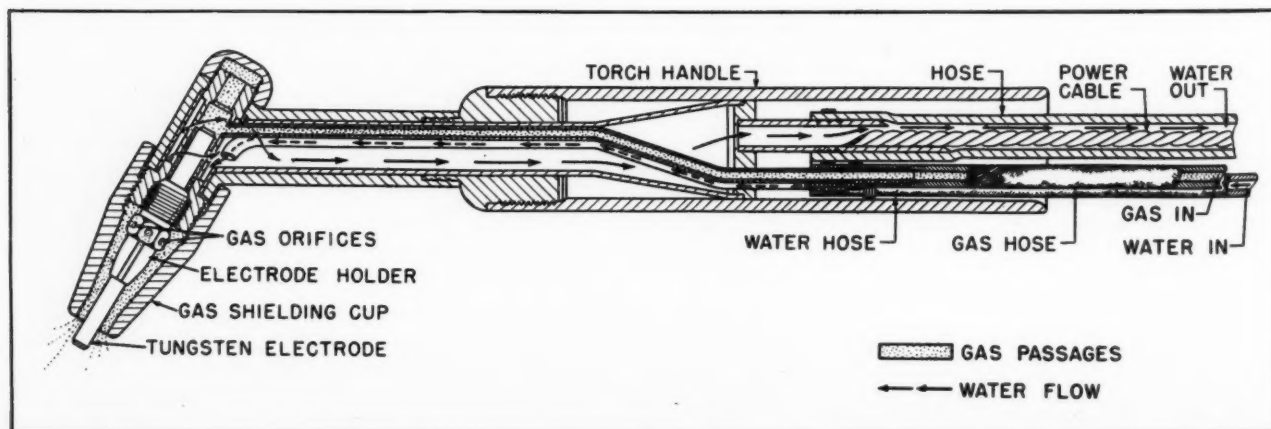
Sectional View of Water-cooled Heliarc Welding Torch
